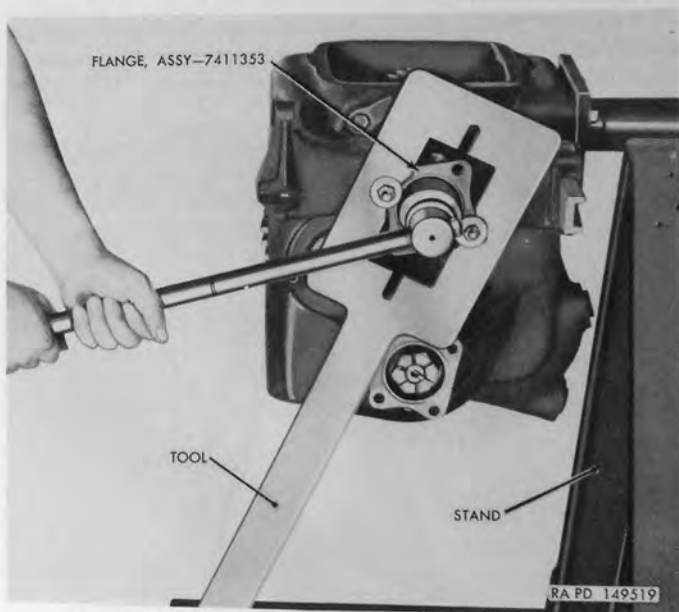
Use of companion flange holding tool 41-T-3215-910.
